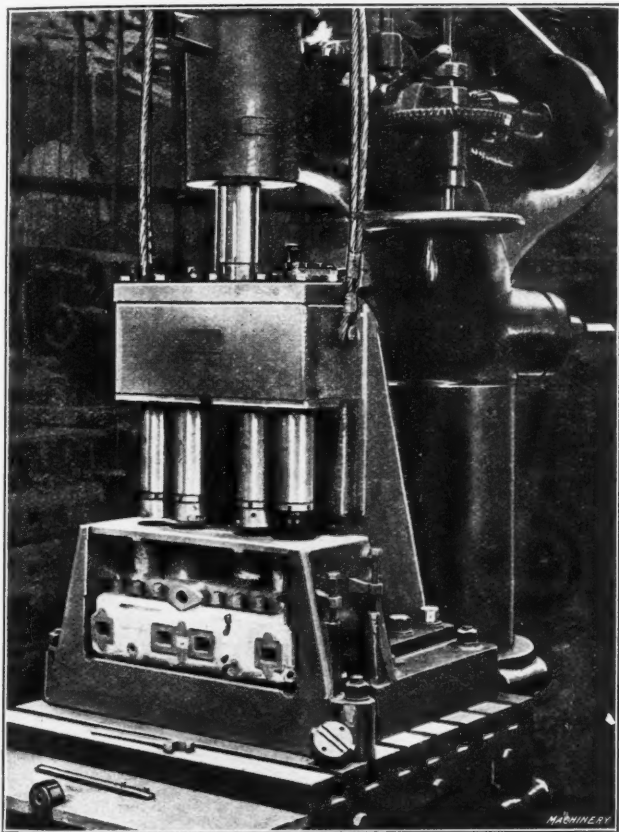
Four-spindle Reaming Attachment and Fixture with Cylinder in Place
